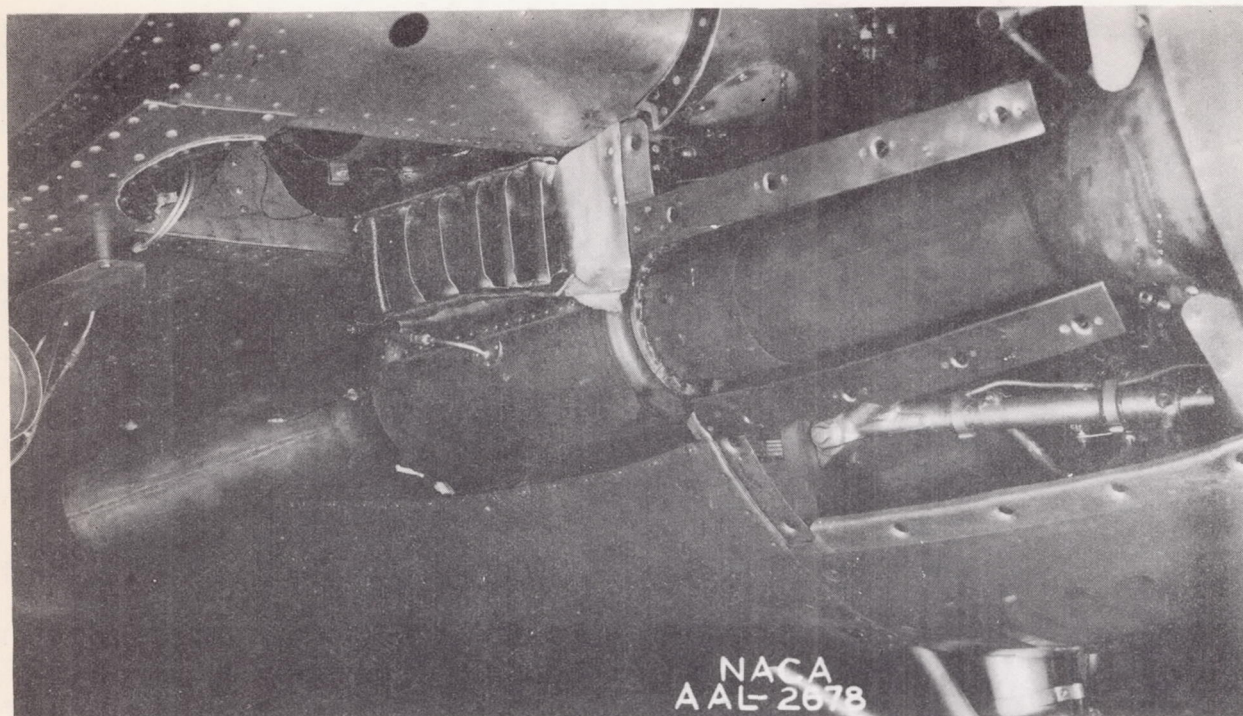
The heat-exchanger assembly installed in the right nacelle of the Lockheed 12A airplane.
